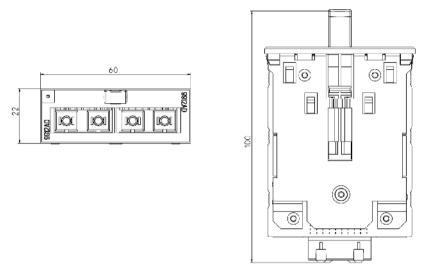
MM900 dimension drawing 4: Optical SC ports
